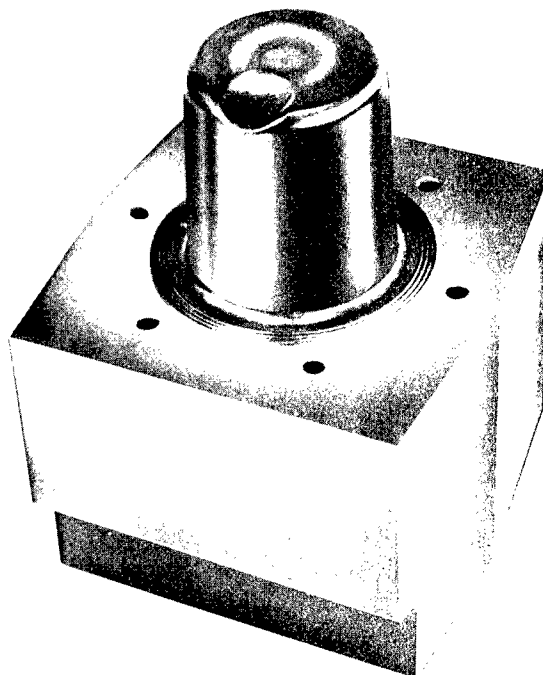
Heavy section aluminum die casting core manufactured from 300-grade VAR maraging steel. (Photograph supplied by Vasco, a Teledyne company.)
